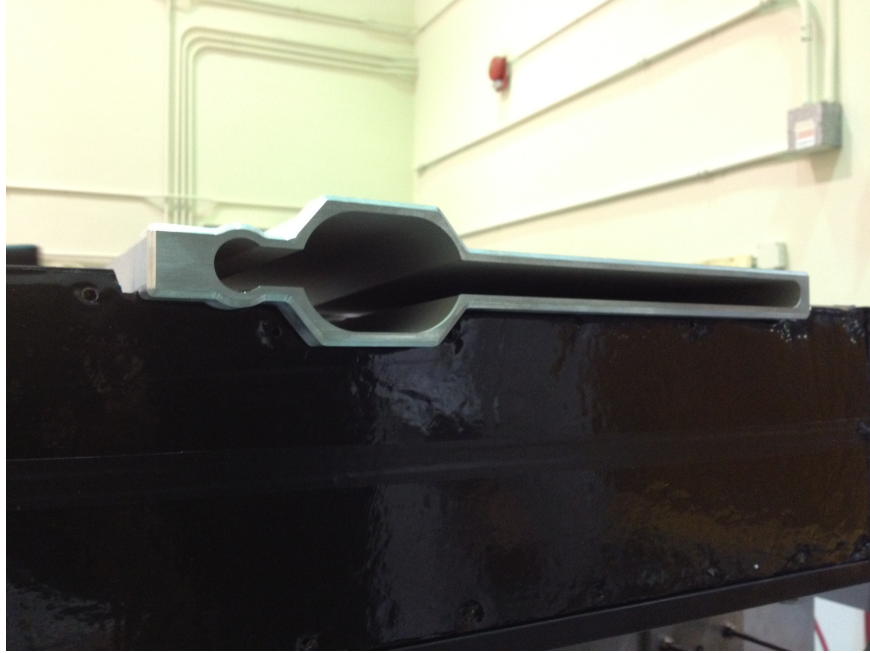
Trial fit of the bottom ECal and the ECal vacuum chamber before welding of flanges.
